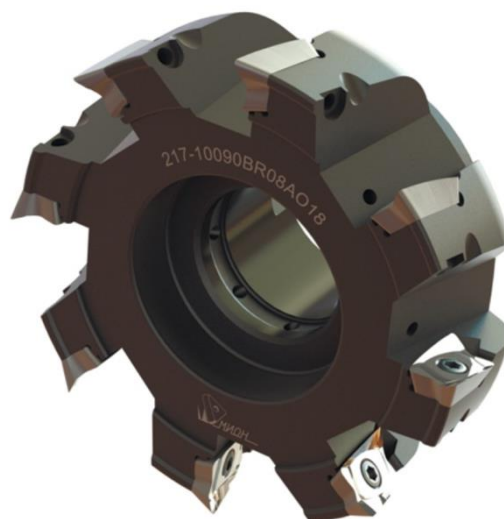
face mill №217 with replaceable multifaceted plates for processing of aluminum and aluminum alloys manufactured in "PC MION".
